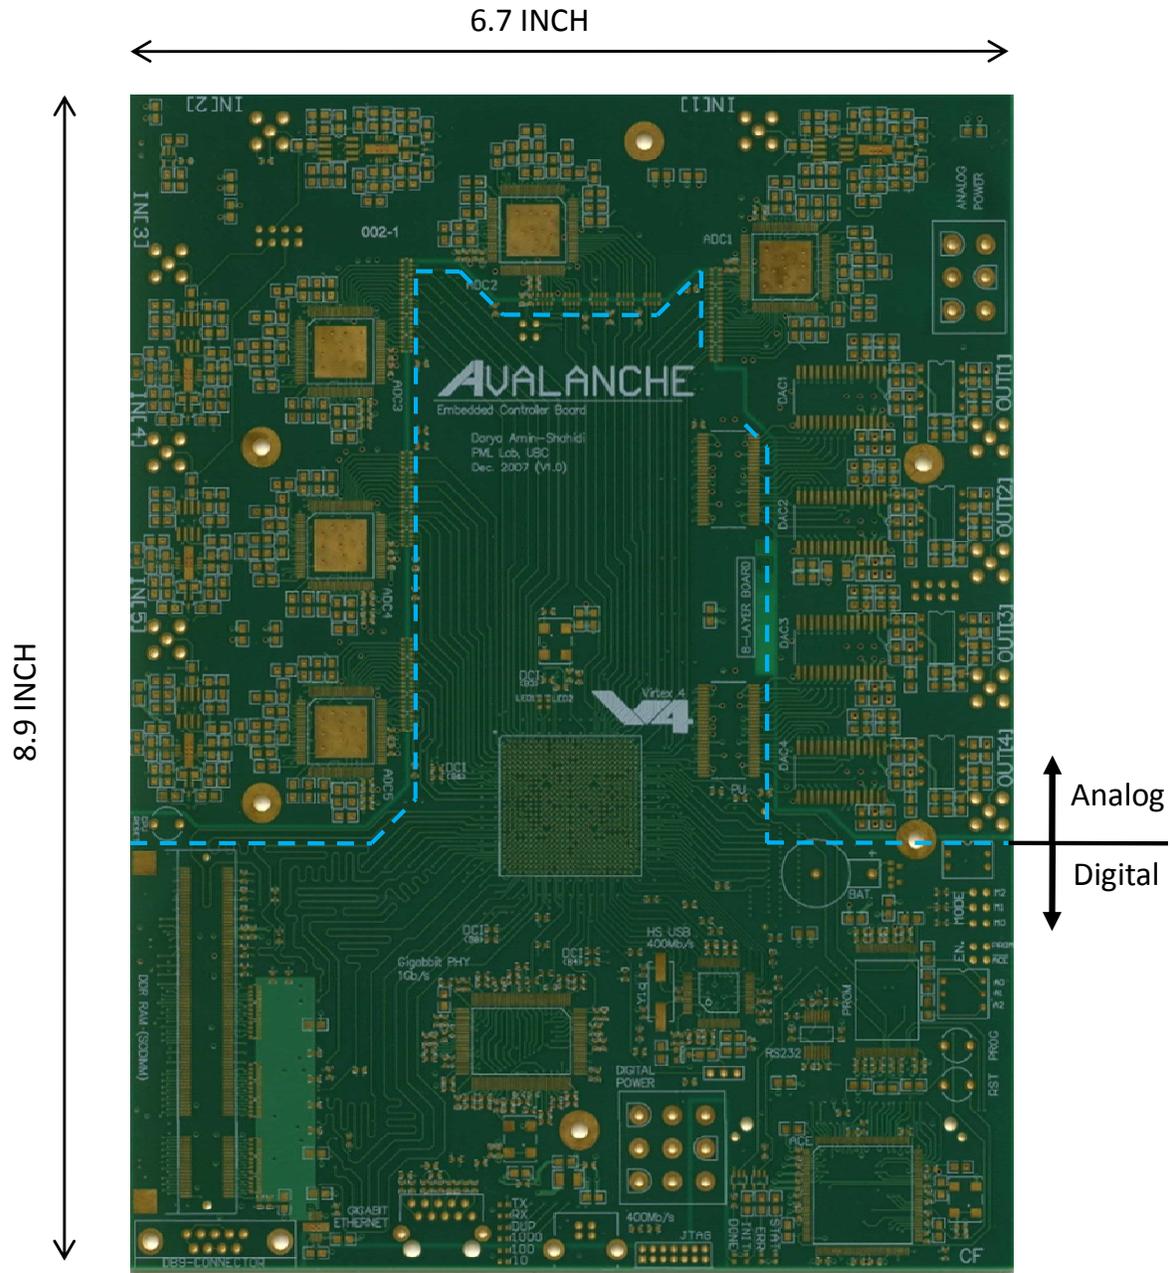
Top view of the motherboard's printed circuit board (PCB)
